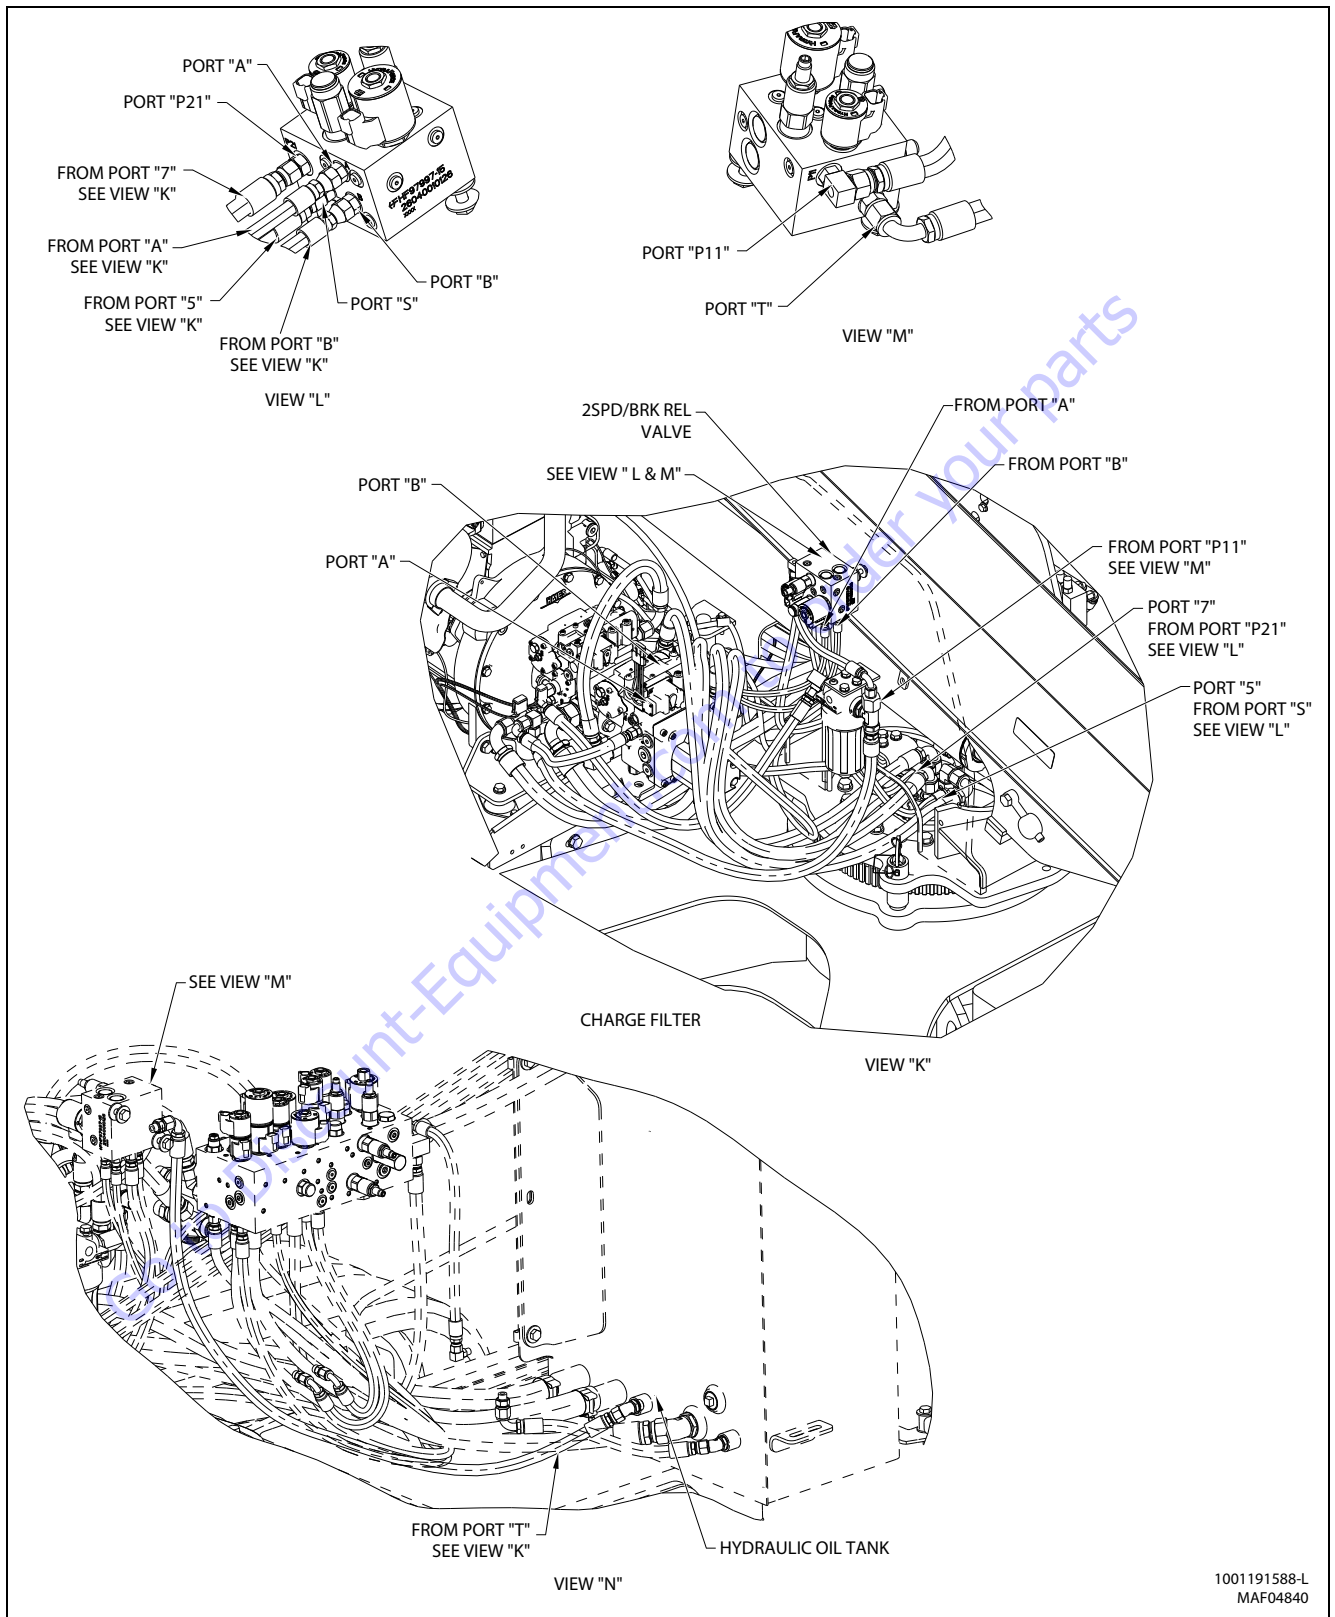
Hydraulic System Installation (400SC) - Sheet 10 of 16
